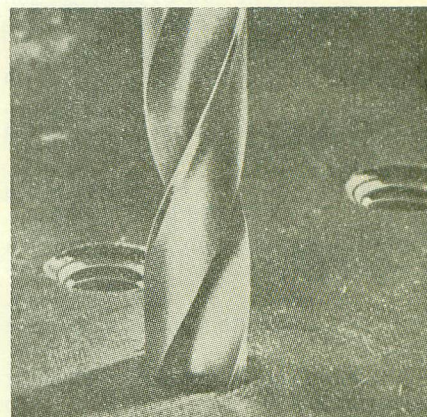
First step in repairing damaged threads is to drill out old threads using exact size drill recommended in instructions provided with thread repair kit. Drill all the way through an open hole or all the way to bottom of blind hole, making sure hole is straight and that centerline of hole is not moved in drilling process. (Series of photos provided by Heli-Coil Corp., Danbury, Conn.)
